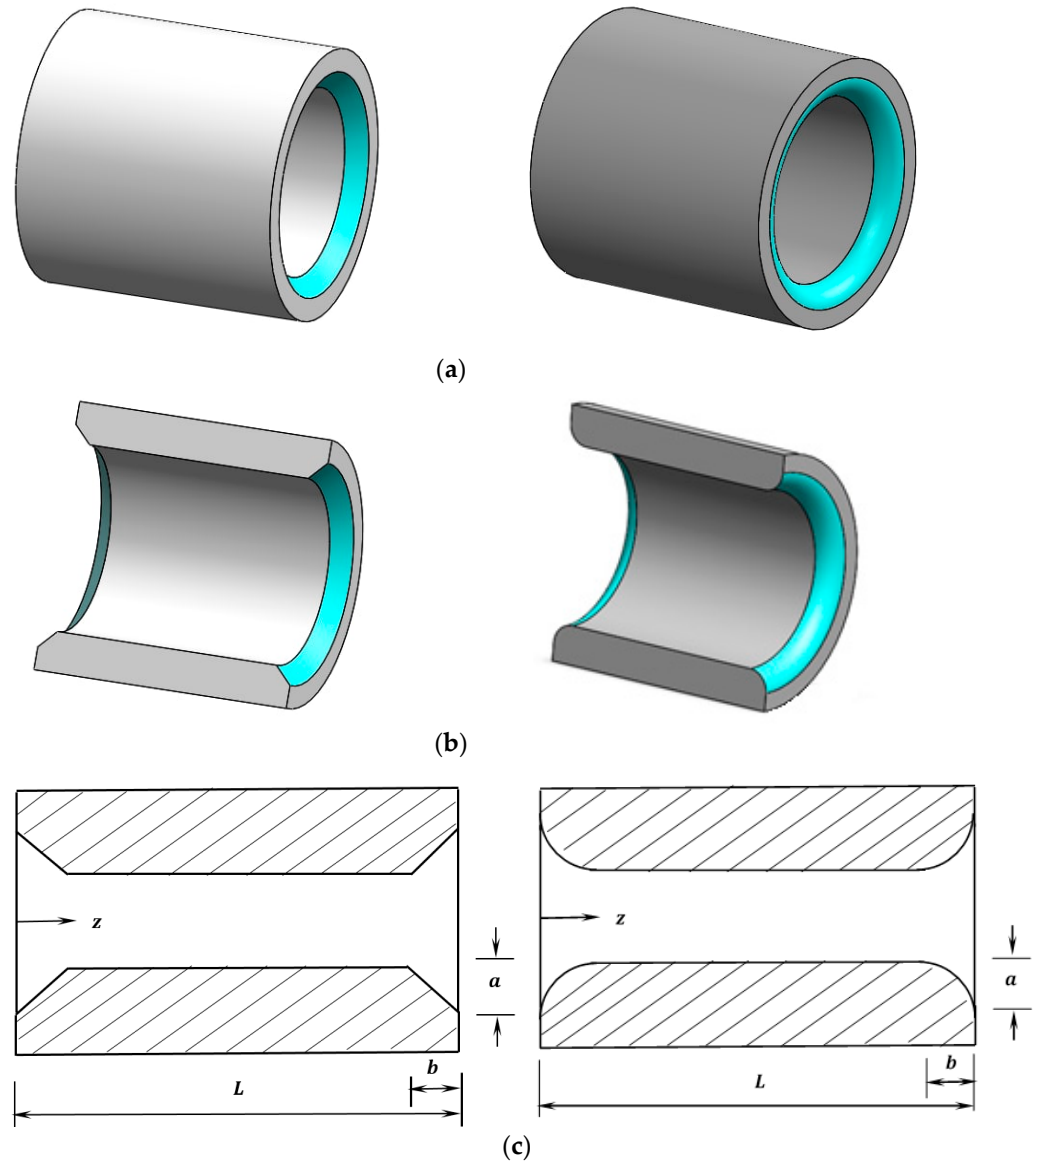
Chamfer geometry. Left: linear and right: curved chamfer. (a) Three-dimensional unmodified bearing; (b) 3D section for the modification; (c) schematic drawing of the chamfered bearing.
